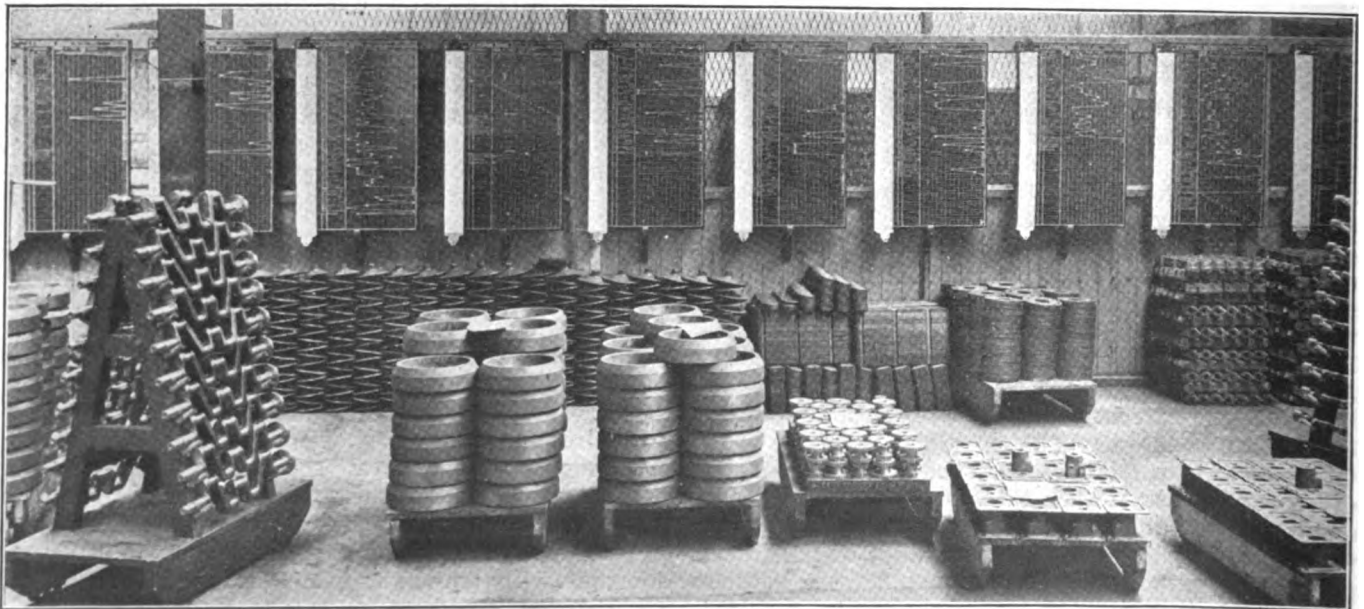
STRING BOARDS IN OPERATION IN FINISHED STOCKROOM
